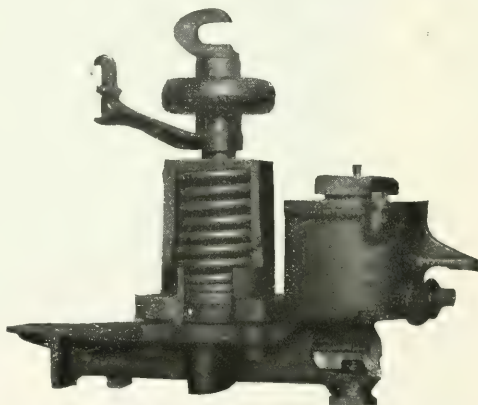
CYLINDER AND MAGNET VALVE OPERATING UNIT SWITCH
